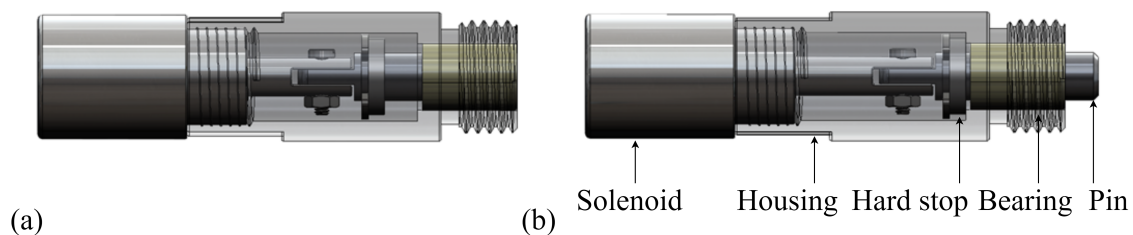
Actuator design. Rendering of final actuator design, (a) shows actuator in unlocked state, (b) shows actuator in locked state and highlights the solenoid, actuator housing, hard stop, bearing, and pin.
